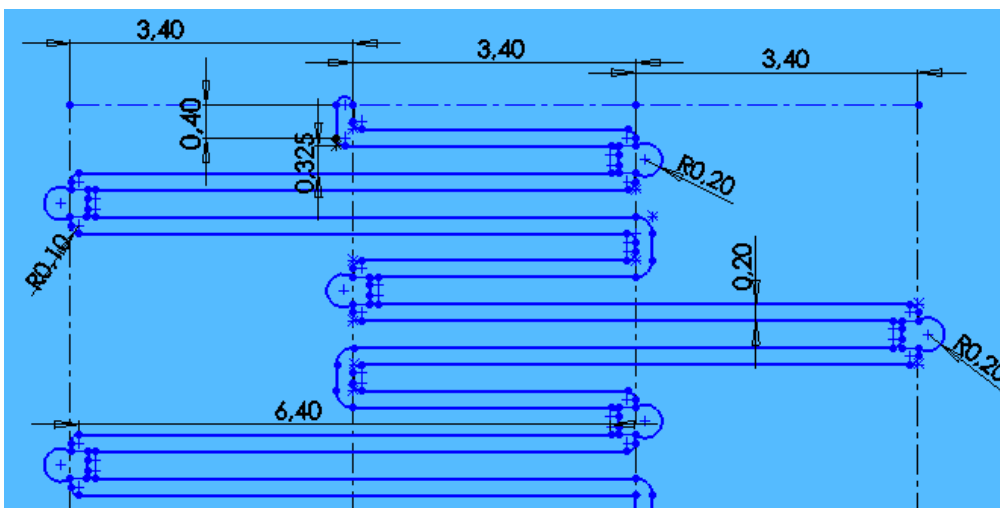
Principal dimensions of the alternating backbone stent, version 2
